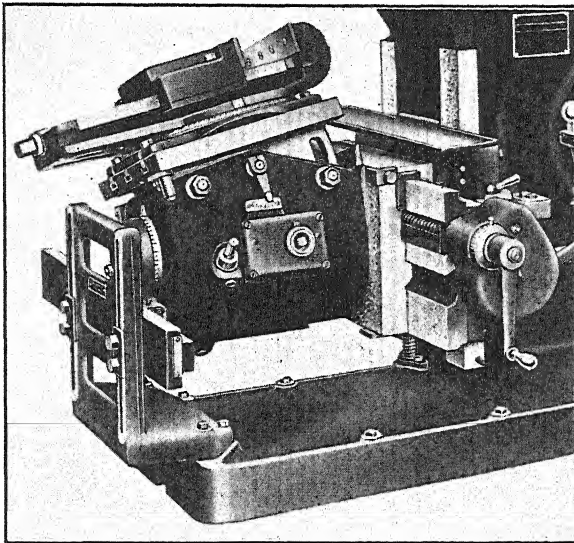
The Dill Slotter Having a 10-In.-Max. Stroke and a 24-In.-Dia. Rotating Table.
